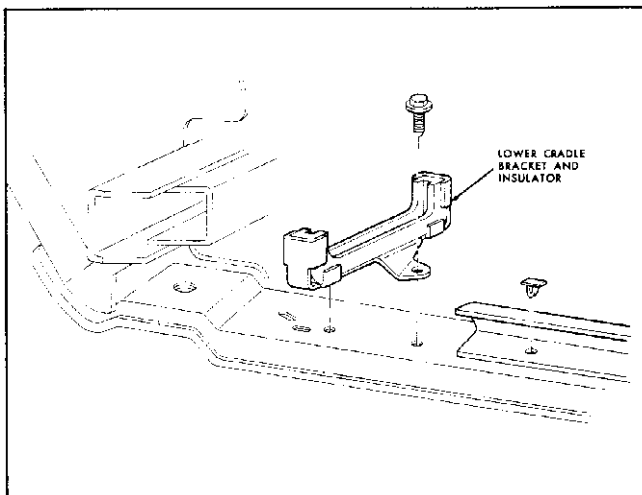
Pontiac Lower Cradle Bracket and Insulator
